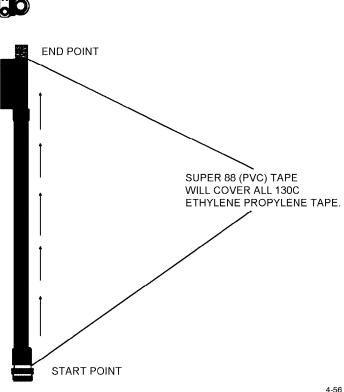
Modified Regulator to Seat Kit Hose Assembly Taping
